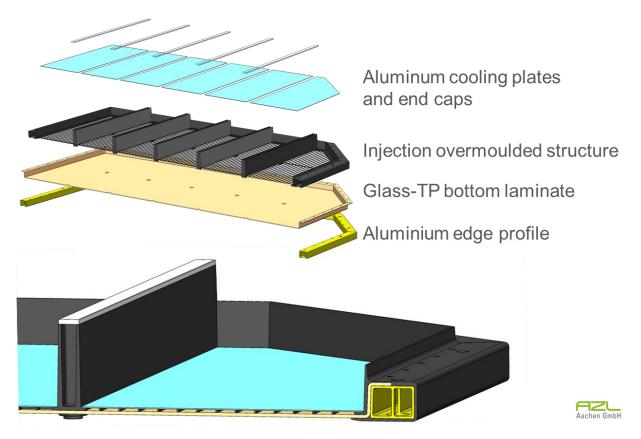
Injection overmolded concept detail and exploded view (left half of casing, lid and protection plate not shown here)
